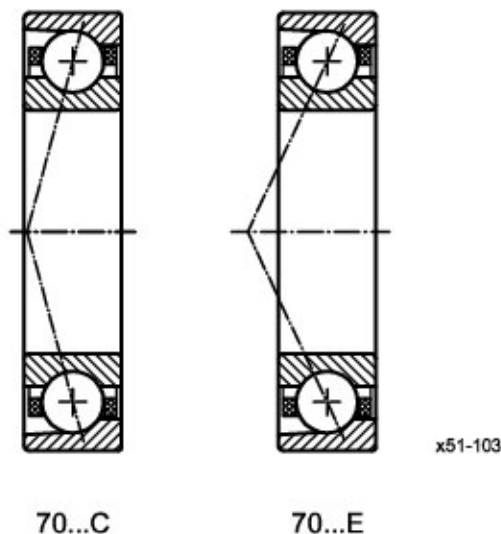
Contact angles for NIBC Super Precision Angular Contact Ball Bearings
